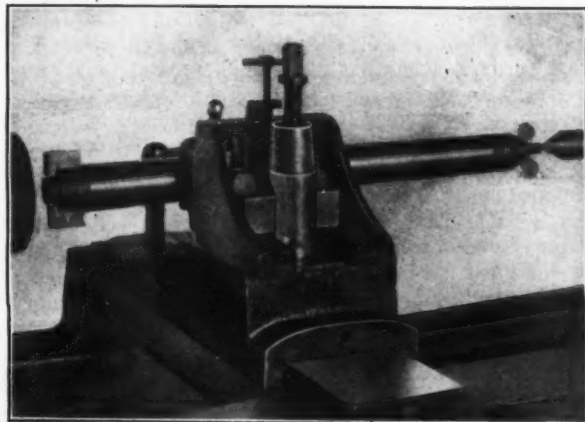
A Reaming Cutter Held in the Krieger Holder.
